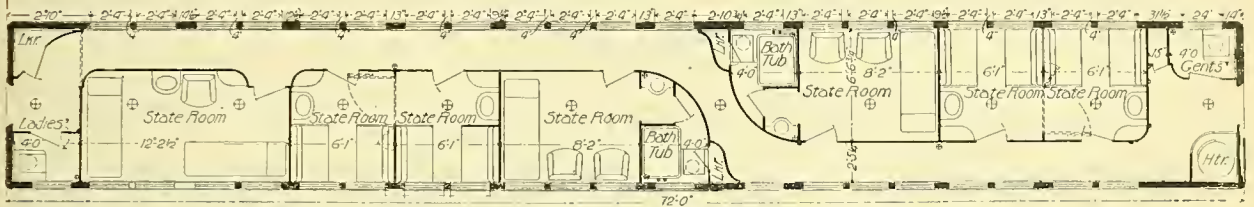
SECTIONAL PLAN OF COMPARTMENT SLEEPING CAR, SAN SALVADOR.
